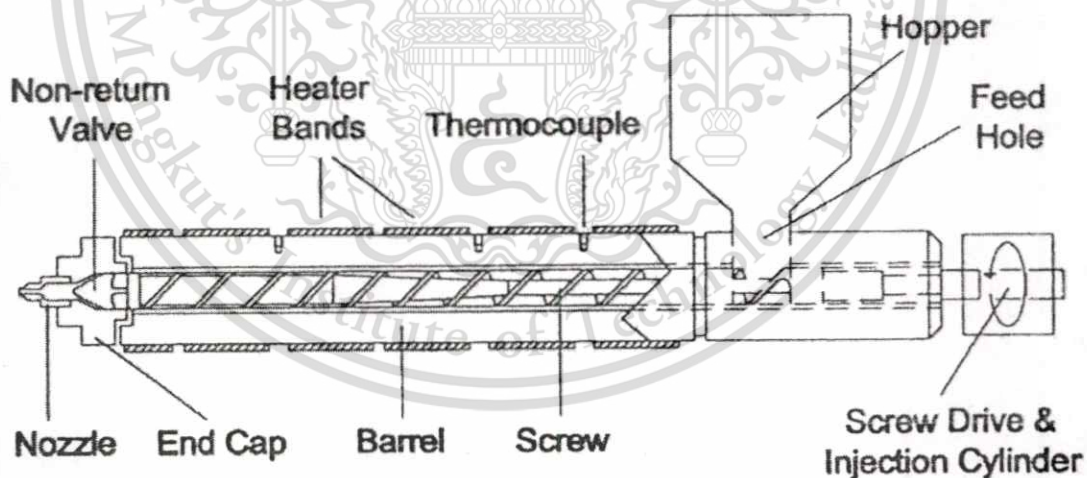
Elements of an injection unit of an injection molding machine [3]
